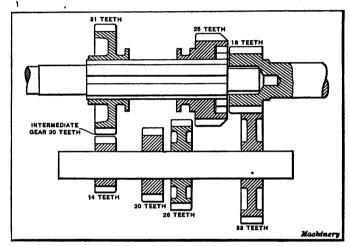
Automobile Transmission Gearing used as Example in the Study of Stub-tooth Gears
